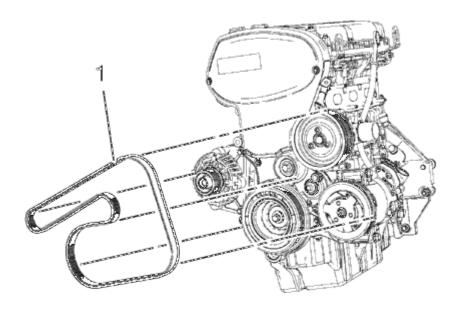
Drive Belt Routing Courtesy of GENERAL MOTORS COMPANY
